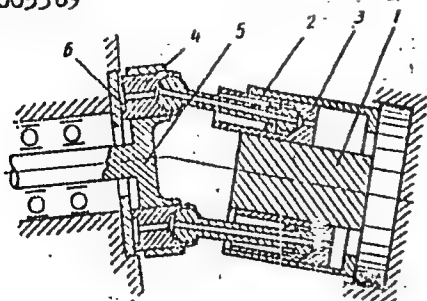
1 - cylinder block; 2 - connecting rods; 3 - pistons; 4 - socket; 5 - drive shaft; 6 - recess in the socket
